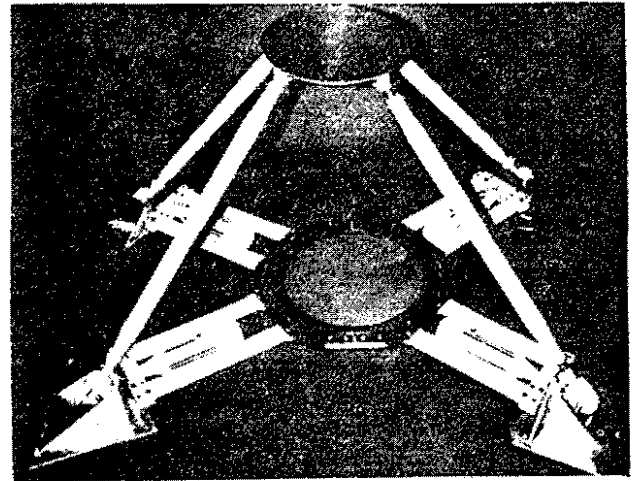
SARIB I ASSEMBLY (not mounted on MGB)
